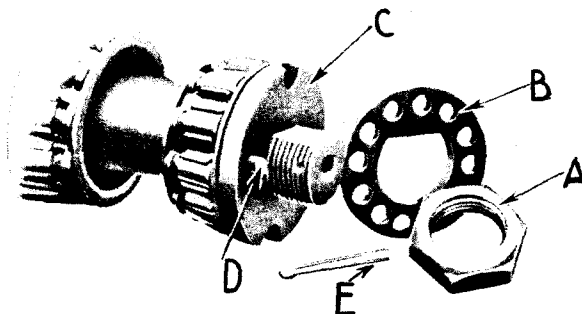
Front Wheel Bearings and Adjusting Nuts.
